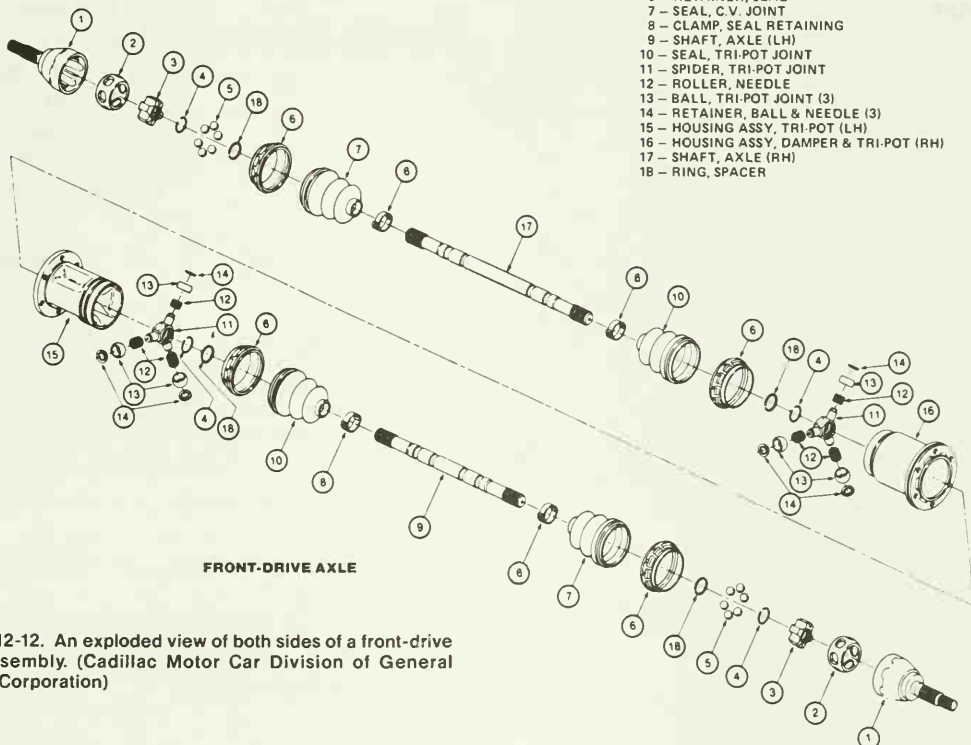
An exploded view of both sides of a front-drive axle assembly. (Cadillac Motor Car Division of General Motors Corporation)
